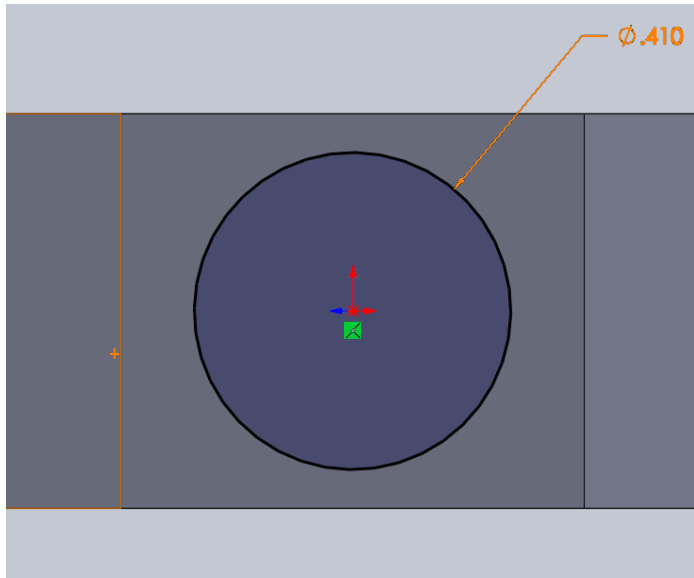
Original Dimensions of Lever Arm Bearing Recess
